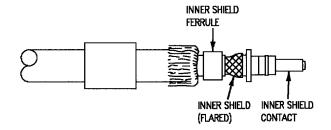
902-5019-2 Triaxial Assembly Procedure (Sheet 1)
